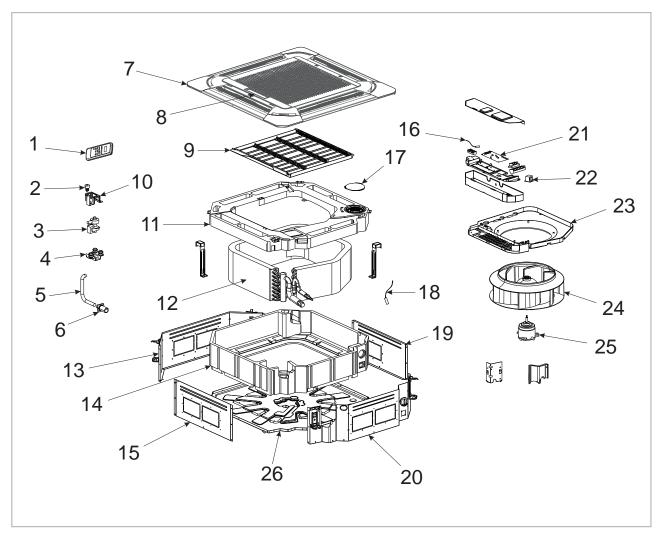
Exploded view of the unit RVD 685-1055 DC IT
